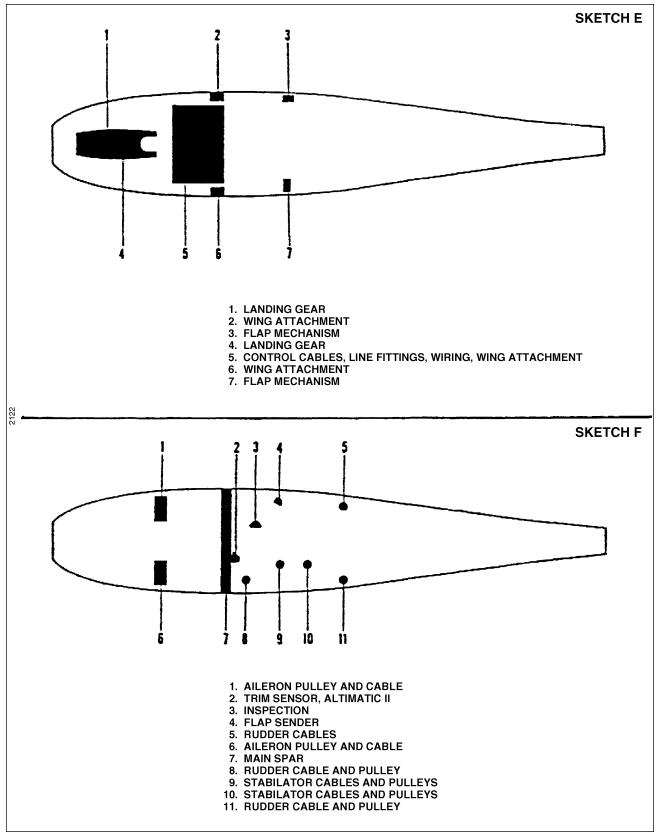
Access Plates and Panels PA-23-235 and PA-23-250 (Sheet 4 of 4)
